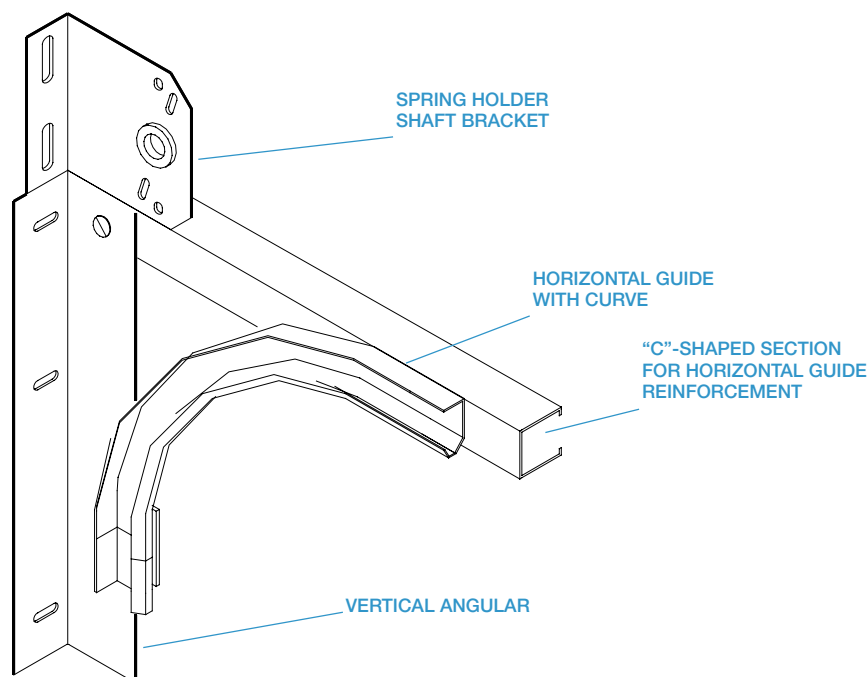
KPSIN DOOR TYPE WITH FF NL/32 OR M203/7925 DRUM
